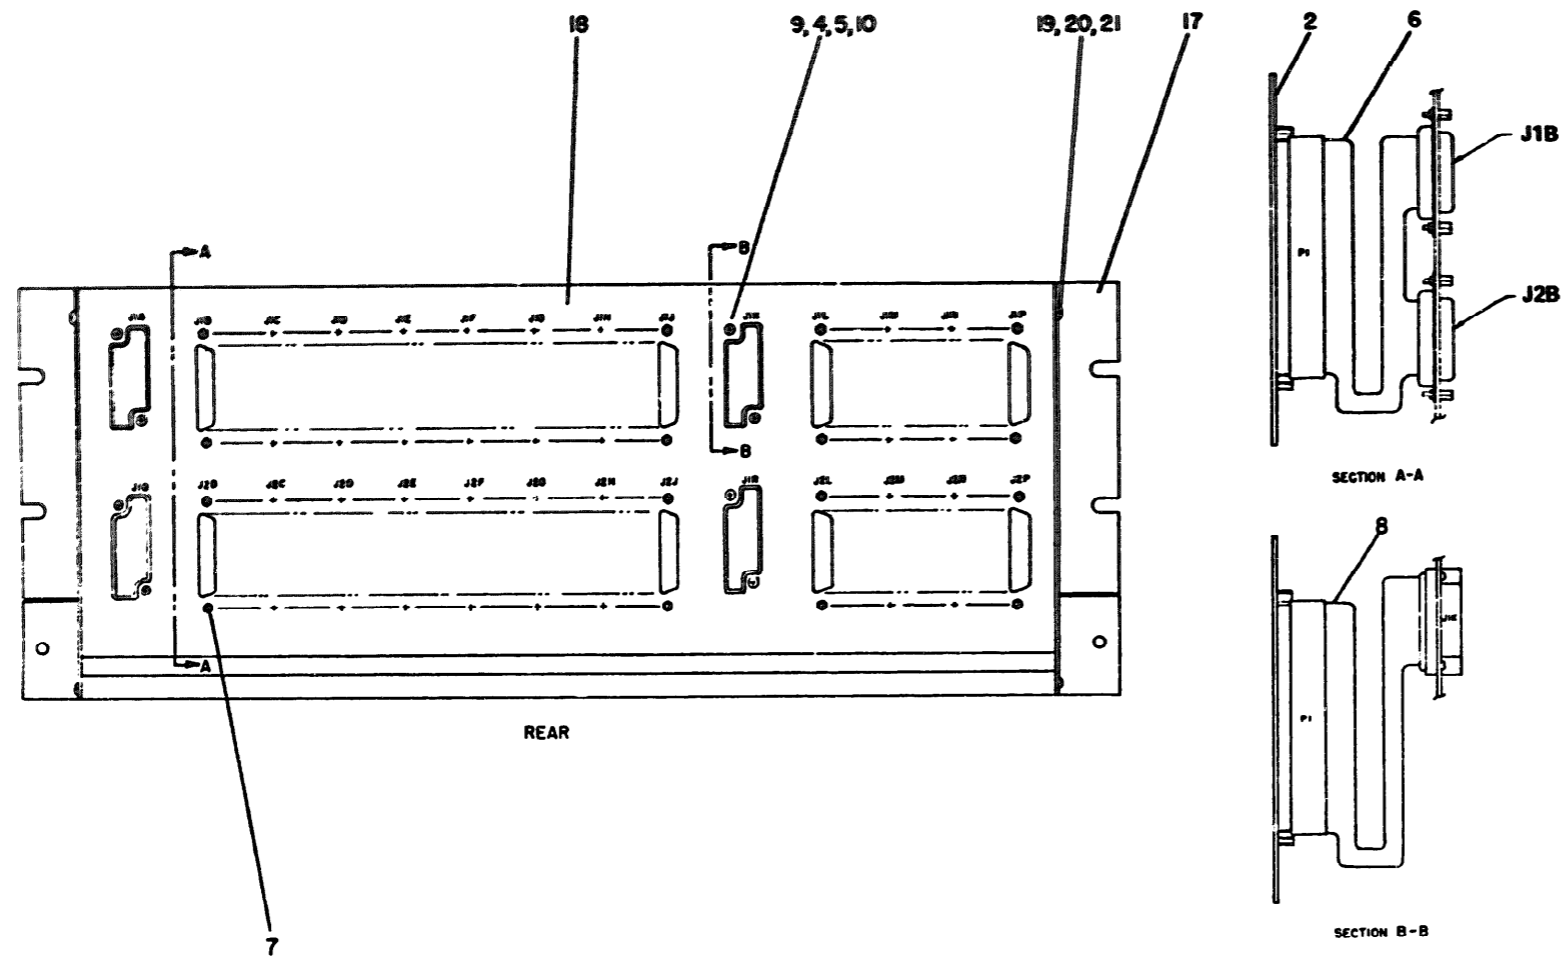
Card File Assembly Digital (Sheet 2 of 2)
